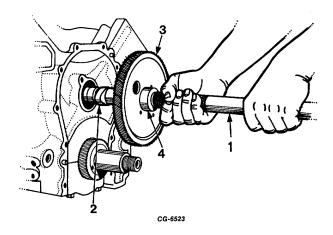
Removing Camshaft, Gear and Spacer as an Assembly
